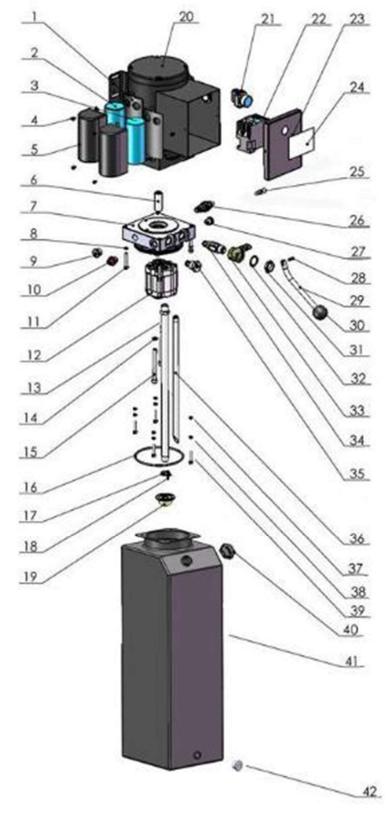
220V/60Hz Single Phase Manual Power Unit Exploded View
